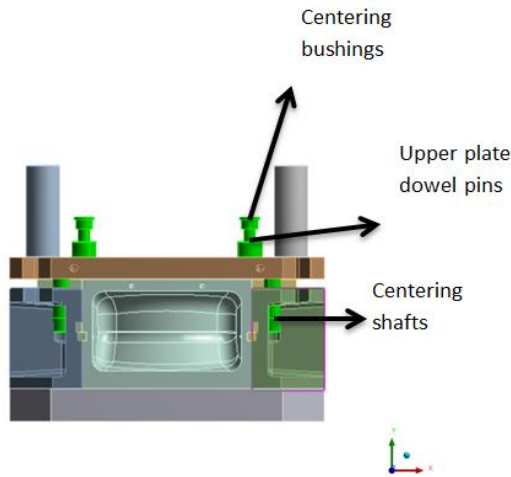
b. The representation of the centering shafts, upper plate dowel pins and centering bushings on the mold geometry.
